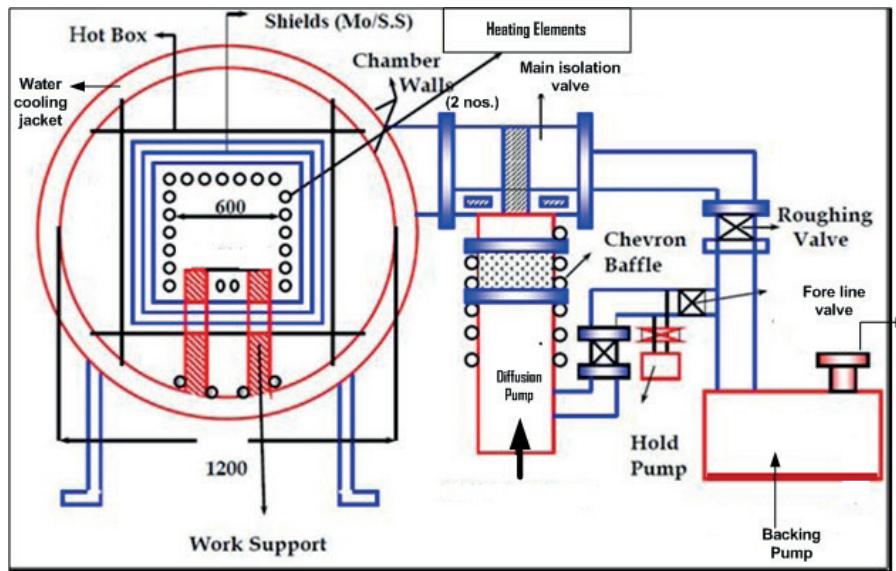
Schematic of typical double walled vacuum brazing furnace (dimensions in mm)
